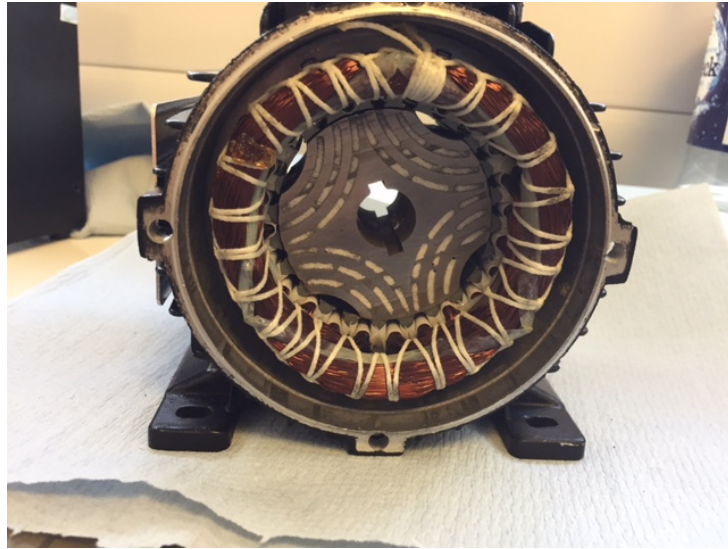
Off-the-shelf motor with SLM-built rotor fitted
